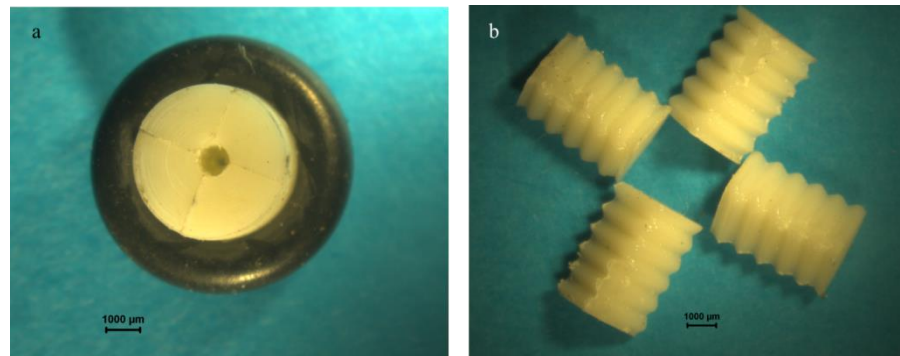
a) 4 way split sabot being held together with a small rubber O-ring. The O-ring is removed when the sabot is loaded into the launch tube. b) The four separate pieces of the sabot. The serrated edges can clearly be seen along the sabot sections. These serrated edges lock the sabot together whilst in the launch tube and separate once in the blast tank.
